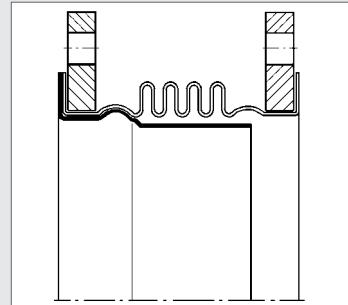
Axial expansion joint with stepped inner sleeve to allow lateral movement
